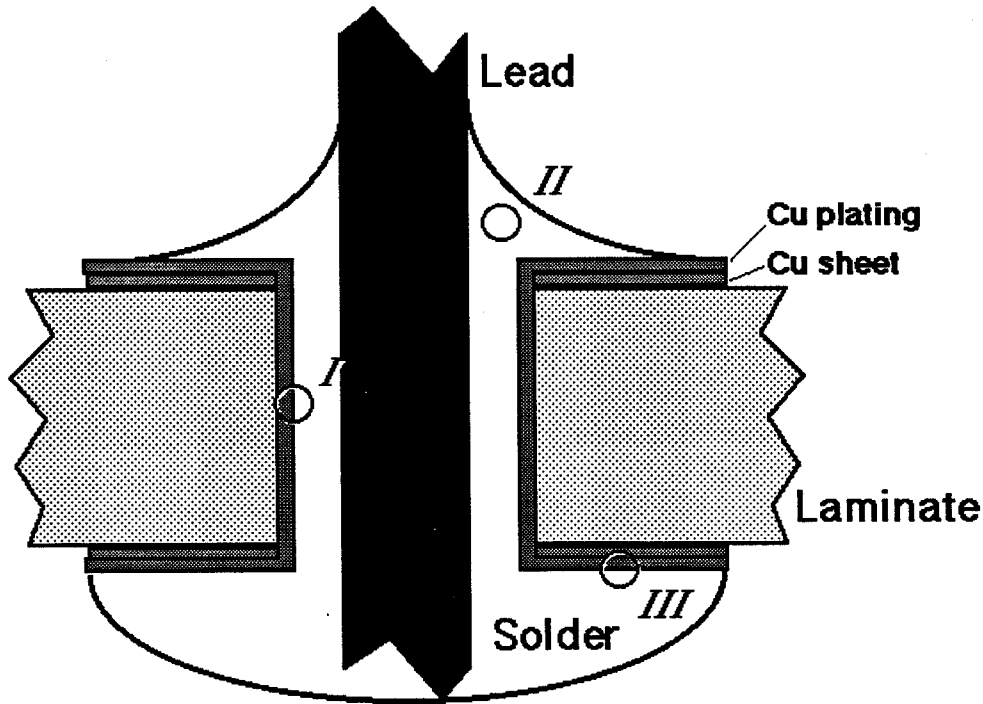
Schematic diagram of a through-hole solder joint showing the locations of the quantitative analyses performed on the MC2839, 234010-00 circuit board solder joints.
